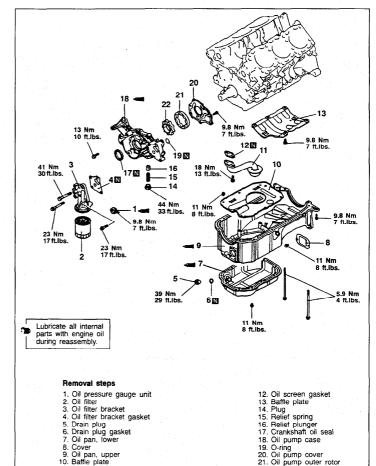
Exploded view of the oil pump mounting-3.5L engine
